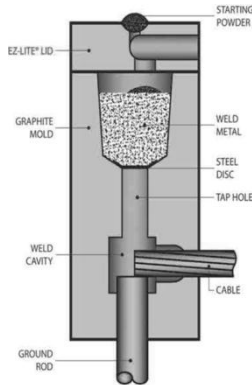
Schematic of a CADWELD unit for exothermic welding.
